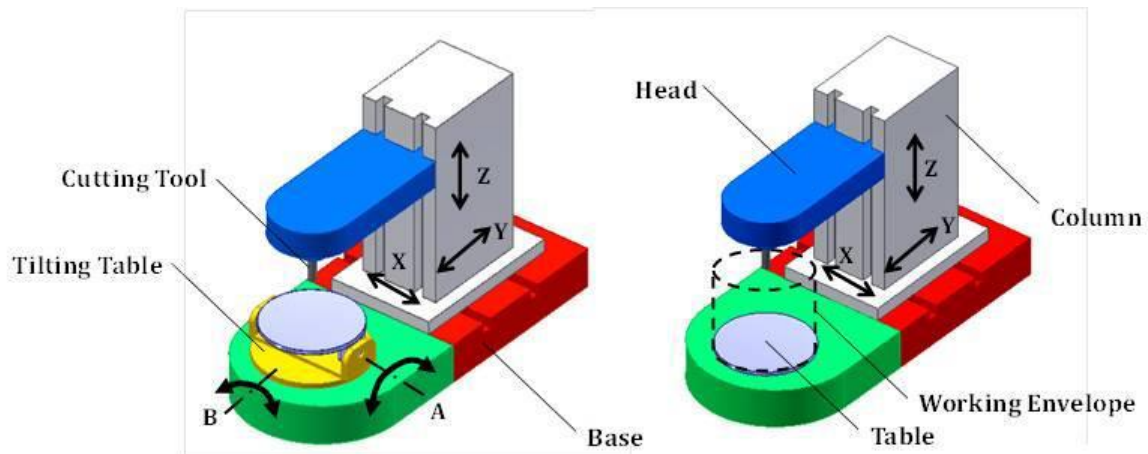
Machining capabilities for 5-axis CNC machine (left) and 3-axis CNC machine (right) (Abbas 2016)
